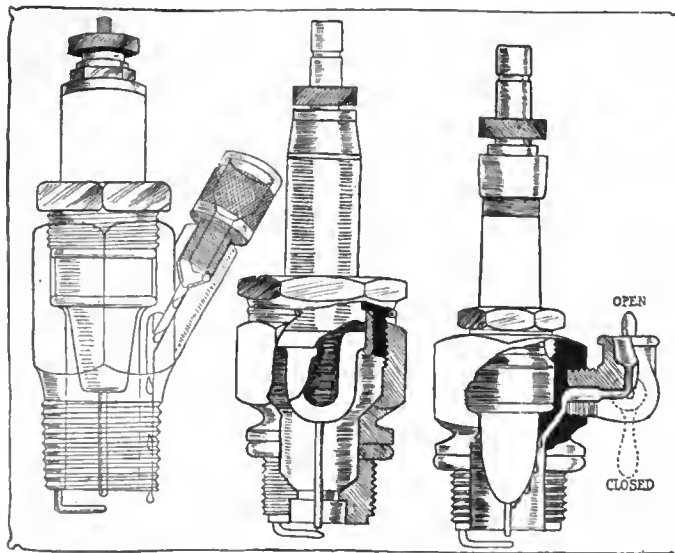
Champion priming. Fig. 11—Red Head combination. Fig. 12—Red Head priming
